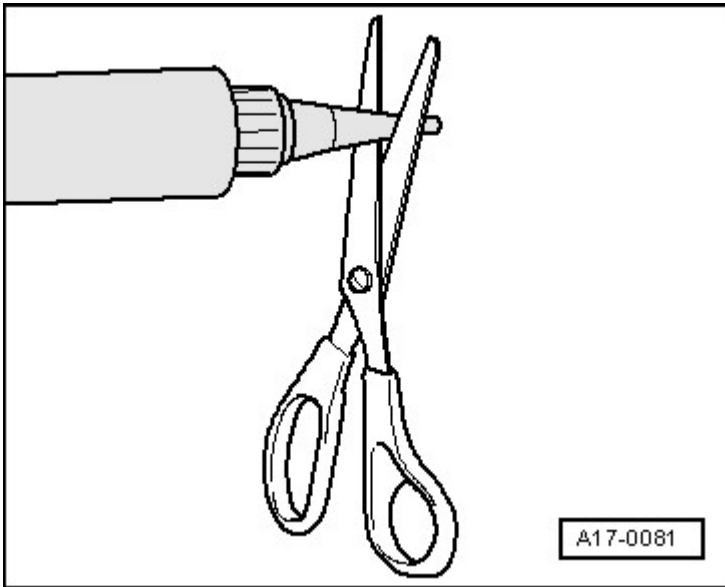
Cut Tube Nozzle At Front Marking (Nozzle Diameter Approx. 3 Mm)
